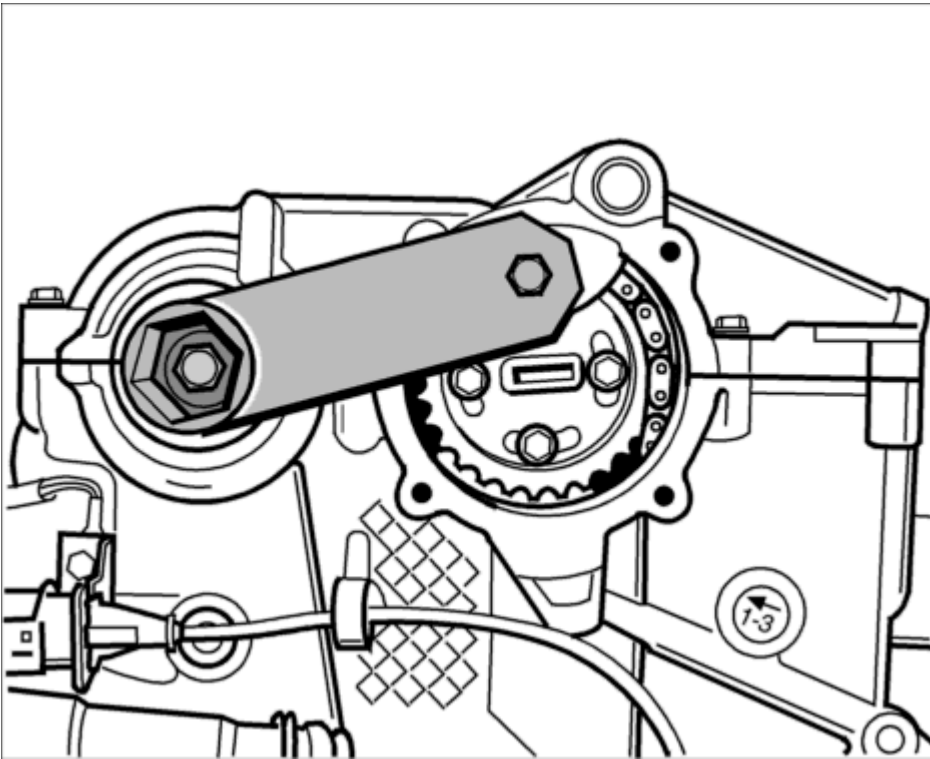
Unscrew the central screw on the camshaft adjuster.
